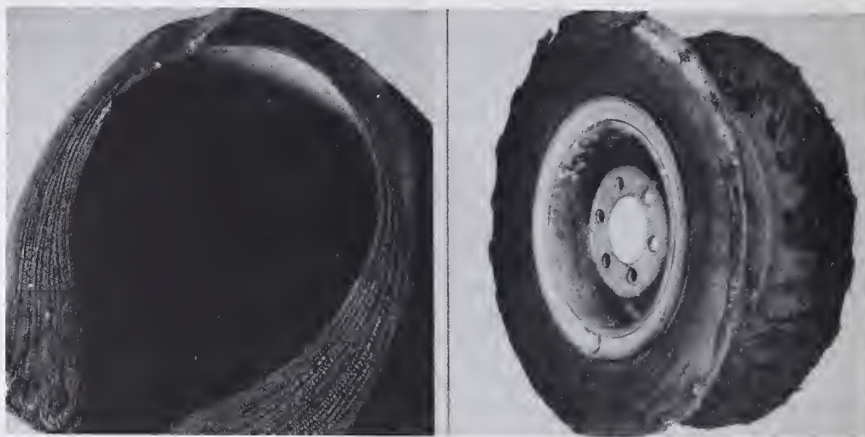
Sectioned view and sidewall stubs of run-flat tire.
